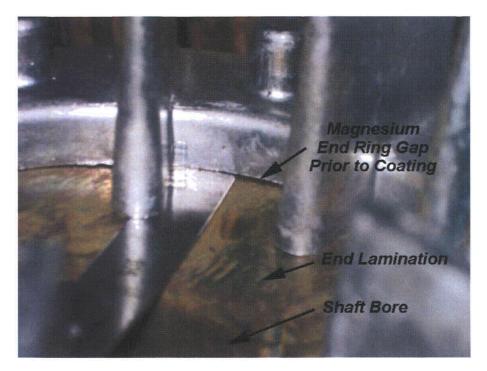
Unpainted magnesium rotor after casting and quenching process.
